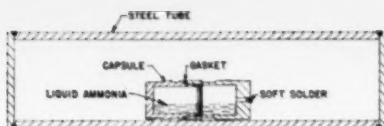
Method of using an ammonia filled capsule for pressure nitriding the inner surface of tubes.
